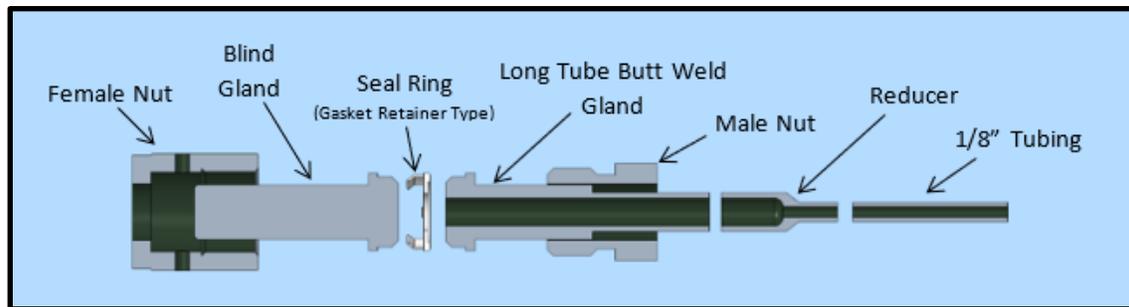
VCR Fitting Test – Typical Test Article Assembly
